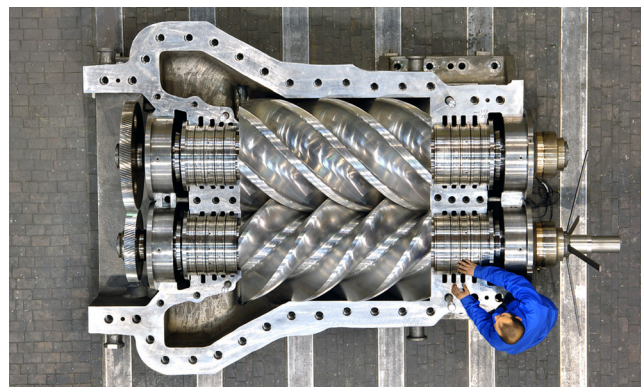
Assembly of a Dry Screw Compressor with Rotor Diameter 32 Inches (816 MM).
